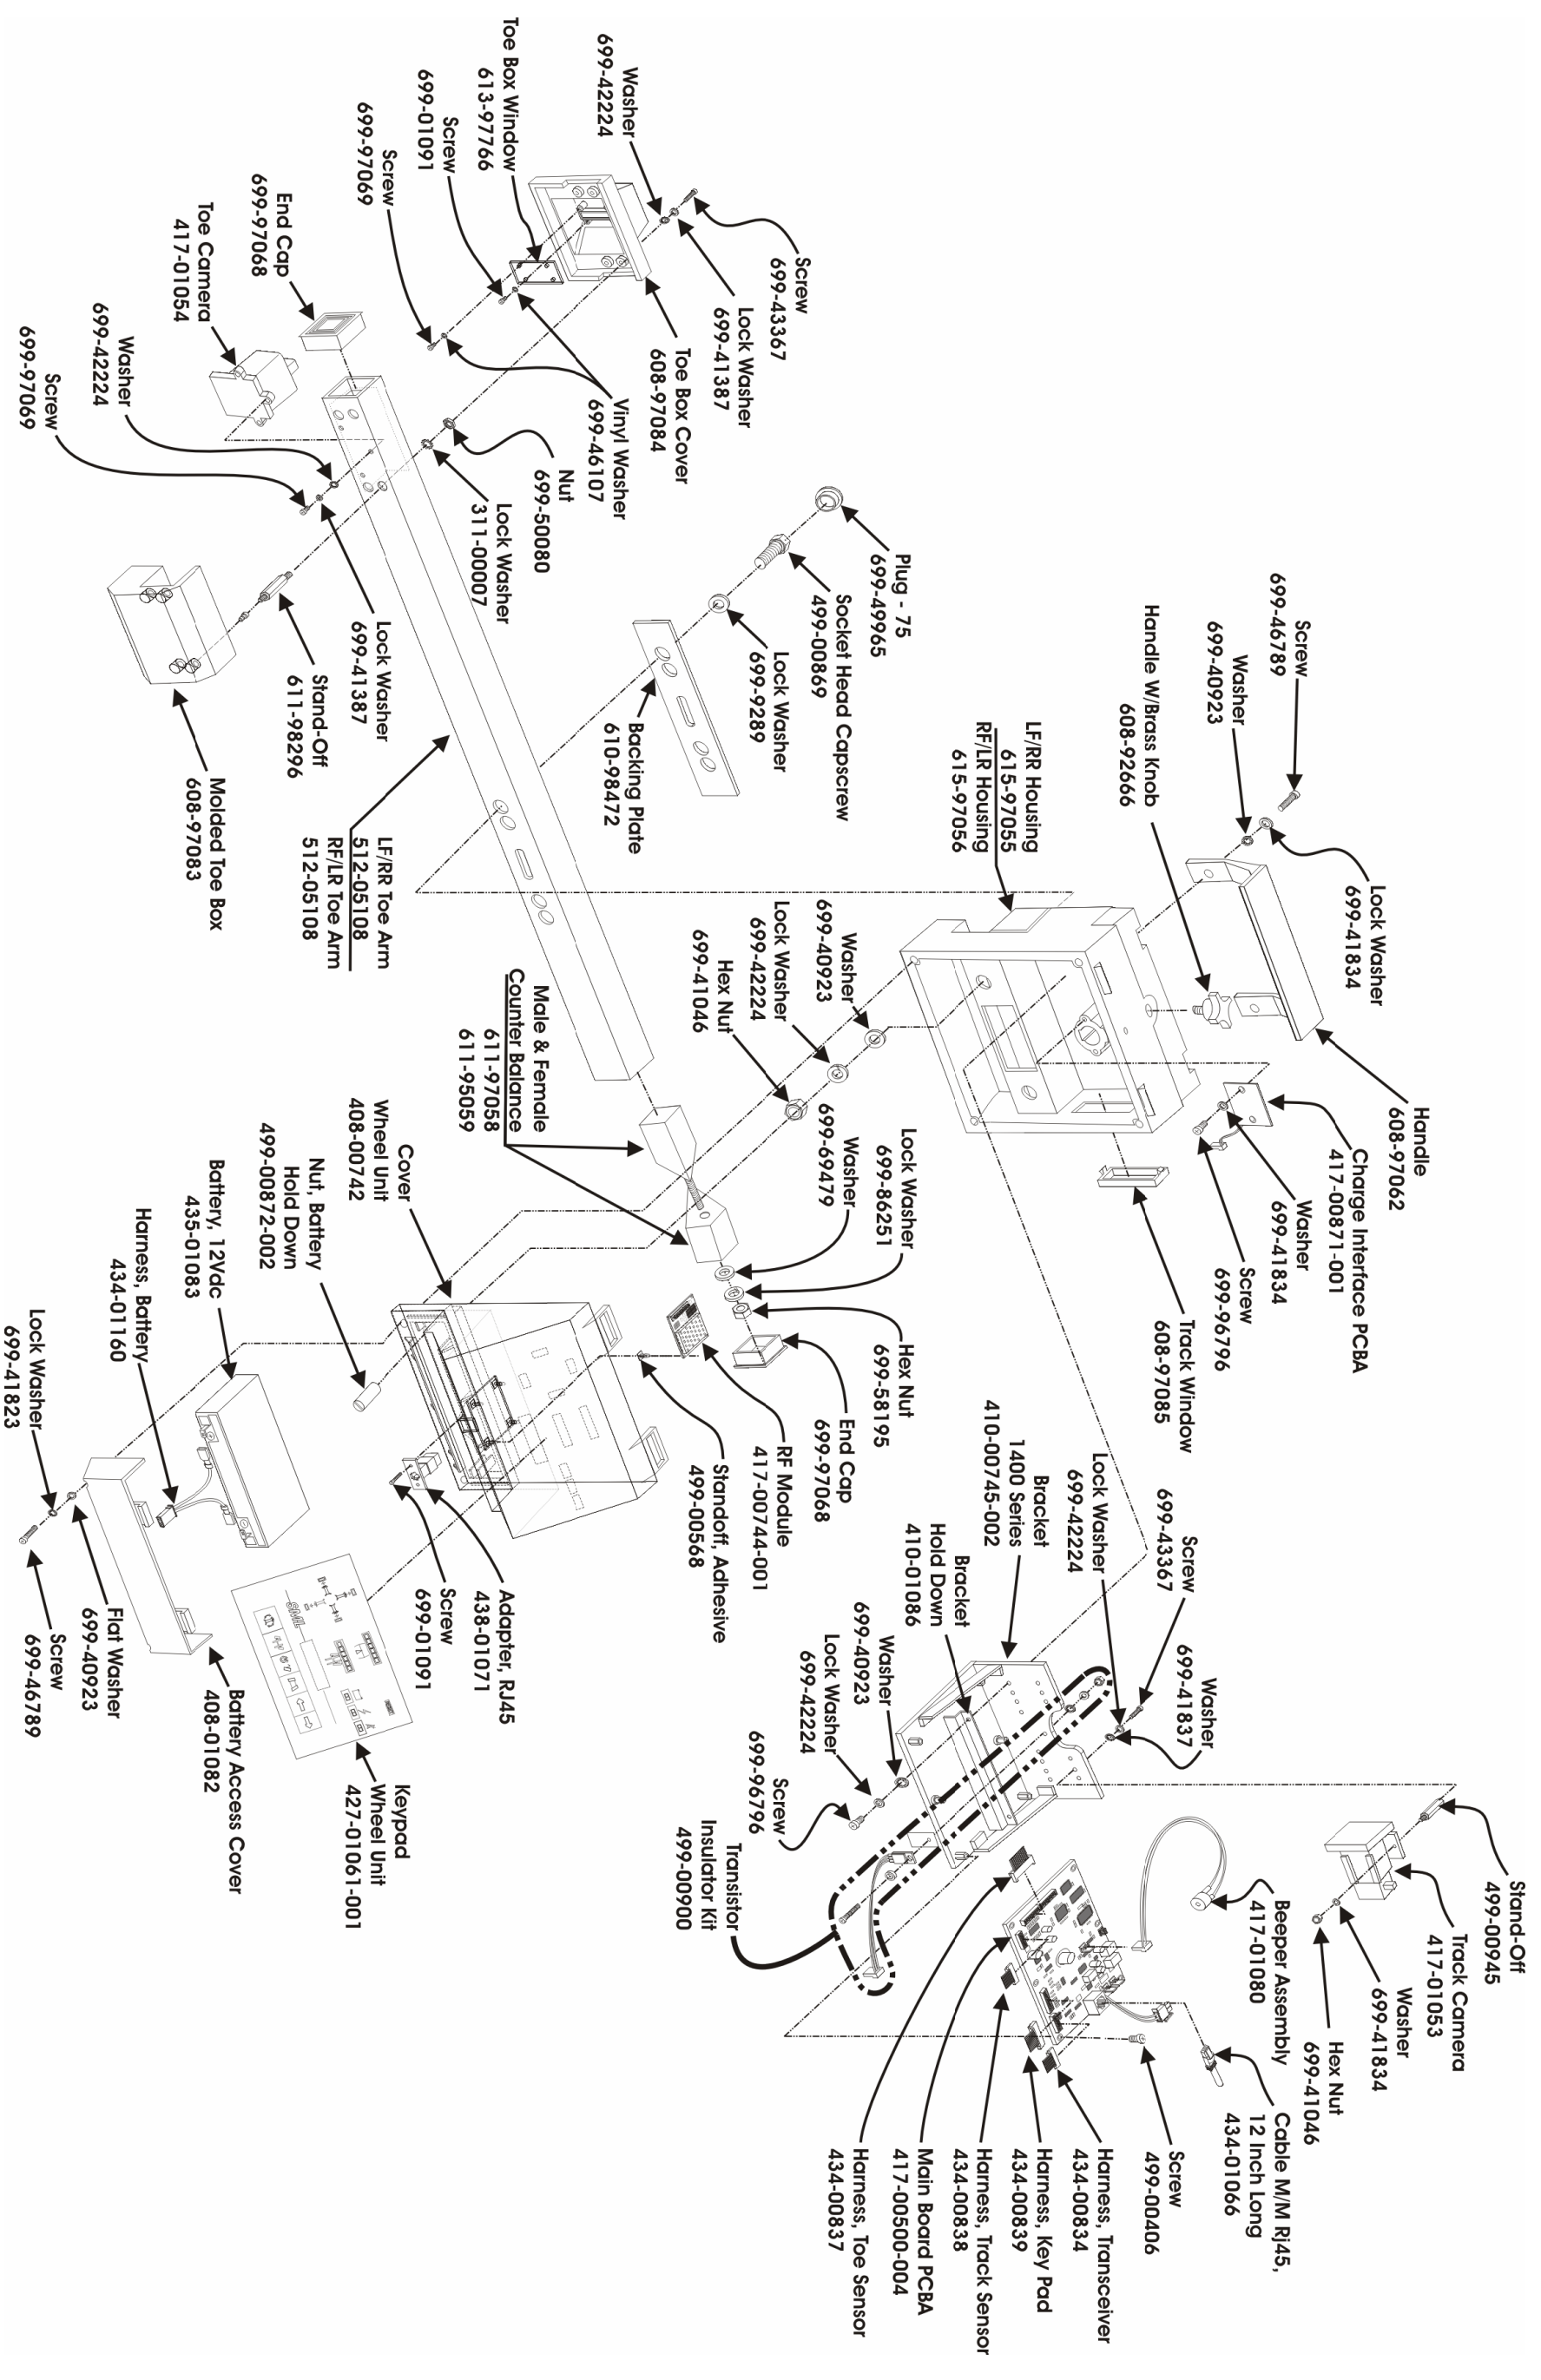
SML Wheel Unit Assembly (1400 Series)
